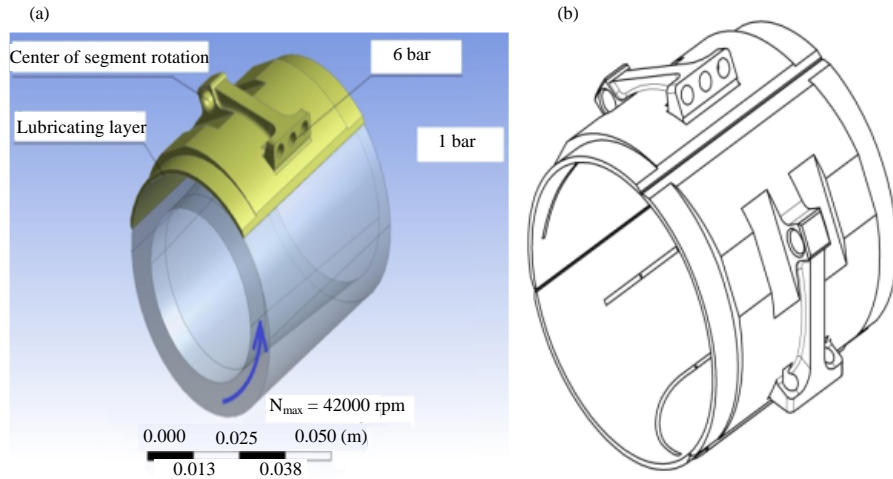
a) Radial bearing and b) Geometric model of the working area for calculating the lubricating layer between the bearing's segment and the shaft
